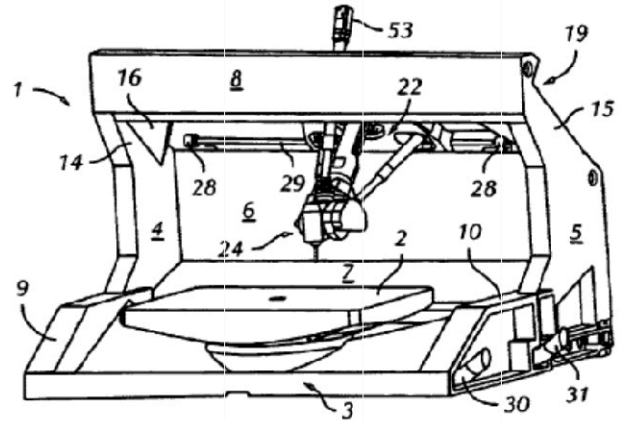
Patent No.: US6682278 Title: Universal combined milling and boring machine
